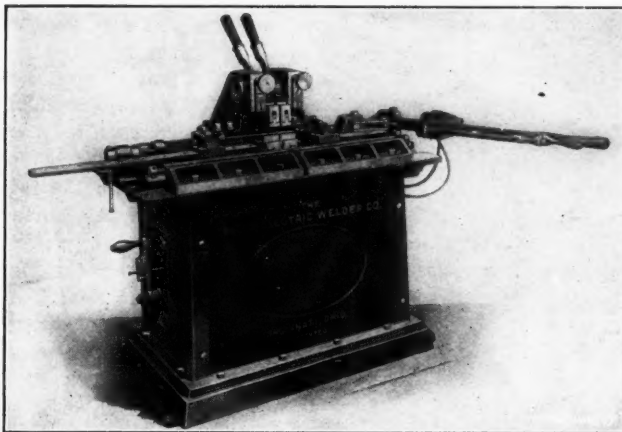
Special "Toledo" Electric Butt-welding Machine designed particularly for welding such Work as Extension Taps, Twist Drills, etc.
